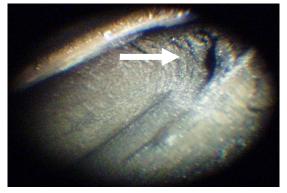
Defects of marine diesel engines' turbocompressors detected during endoscopic investigations
